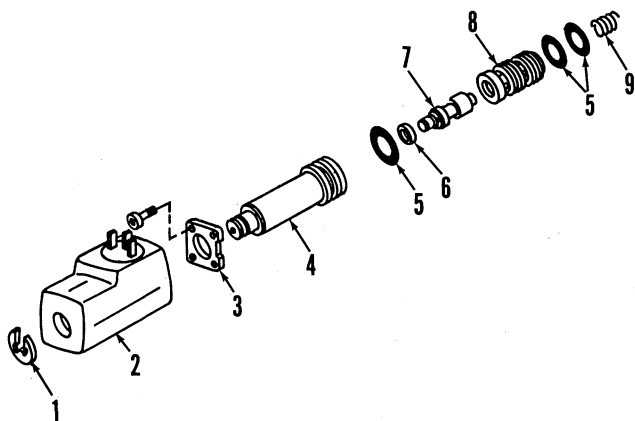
Exploded view of MFWD solenoid valve assembly used on early Power Shift tractors and all Quad-Range tractors.
